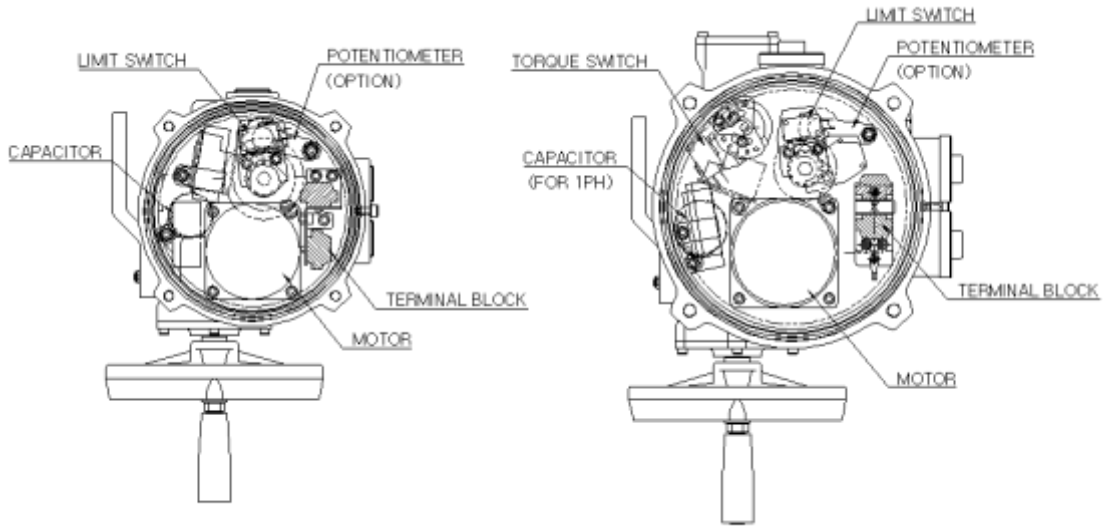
External View for UTQ-010, 020, 040, 060, 080, 120
